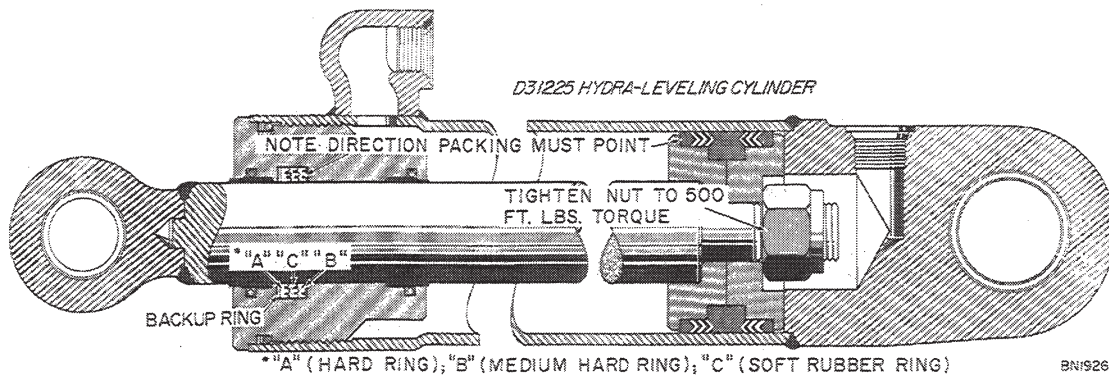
Cross-Sectional View of Hydra-Leveling Cylinder
